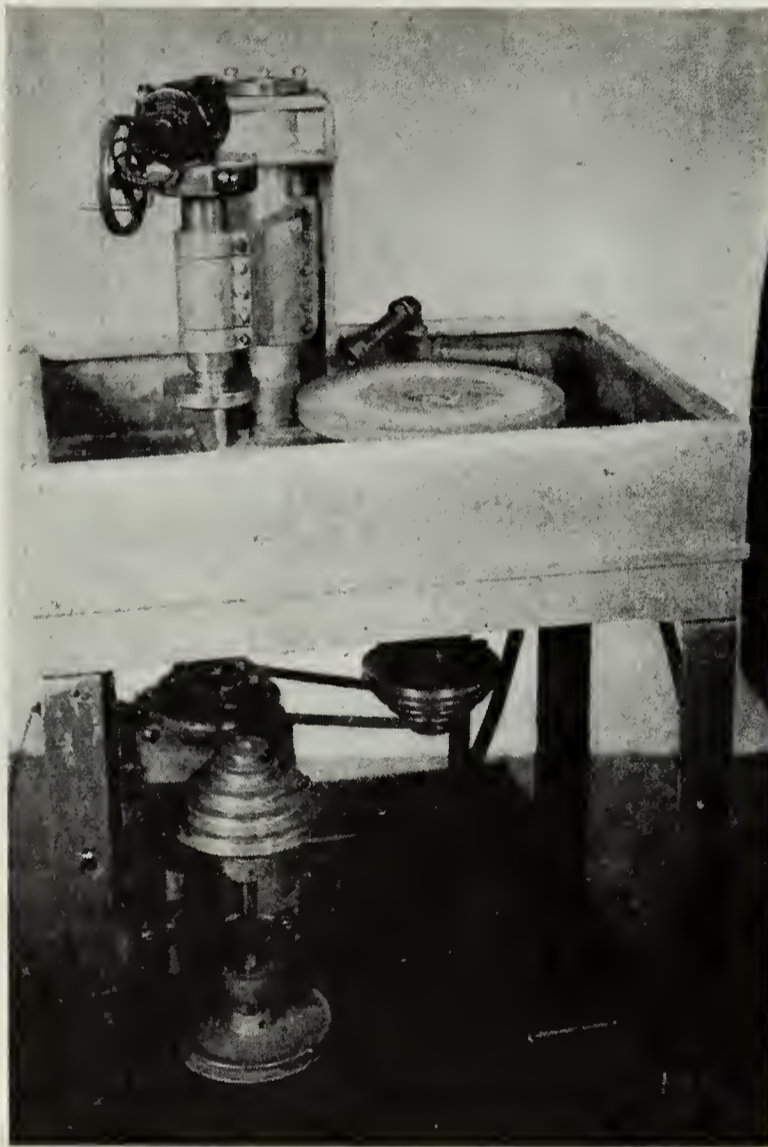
Sperisen Universal Lapping and Grinding Machine.
